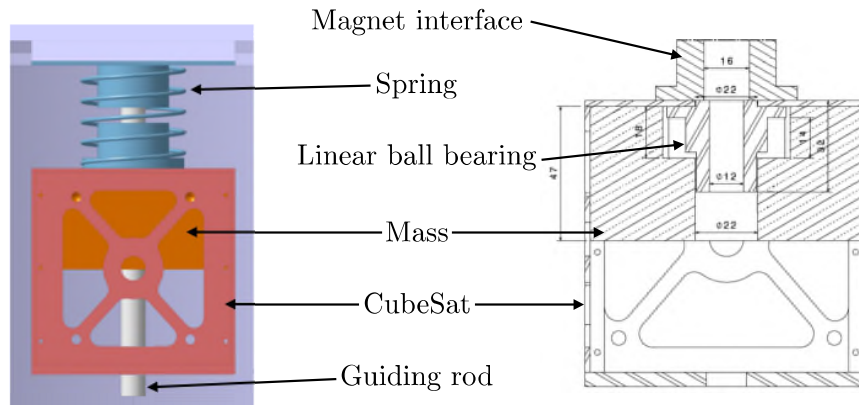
(Left) CubeSat and Release Mechanism as placed inside the vacuum chamber. (Right) Cross section of the CubeSat and the RM elements attached to it (magnet interface and linear ball bearing) (units in cm)
